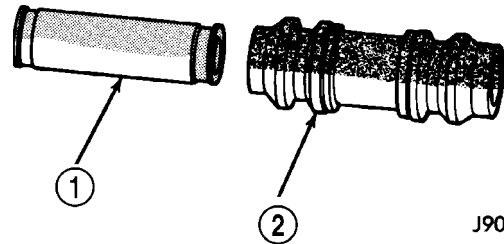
MOUNTING BOLT BUSHING AND BOOT - TYPICAL
